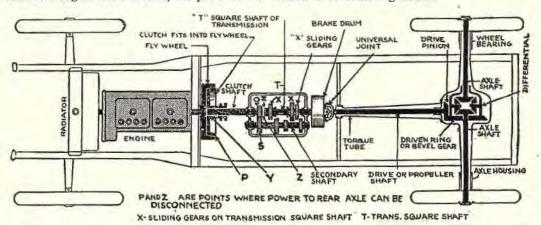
Illustration explains how the power is transmitted from engine to clutch, thence to secondary or counter shaft. Note drive parts are fly wheel, clutch, clutch shaft, drive gear (O), secondary shaft gear (S), and gears on secondary shaft. The driven gears are the sliding gears (X) on the square shaft (T).
